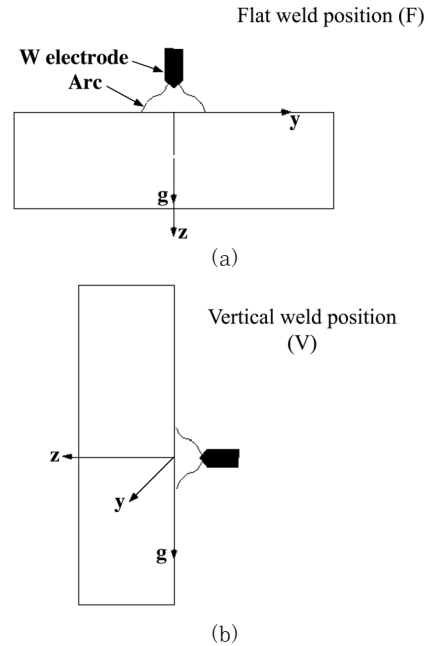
Welding positions: (a) flat position and (b) vertical position
